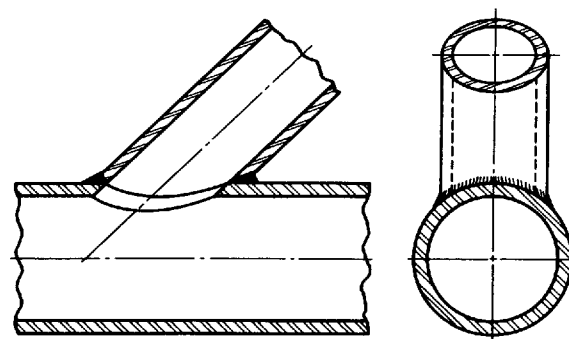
C TYPICAL WELDED ANGULAR BRANCH CONNECTION WITHOUT ADDITIONAL REINFORCEMENT
